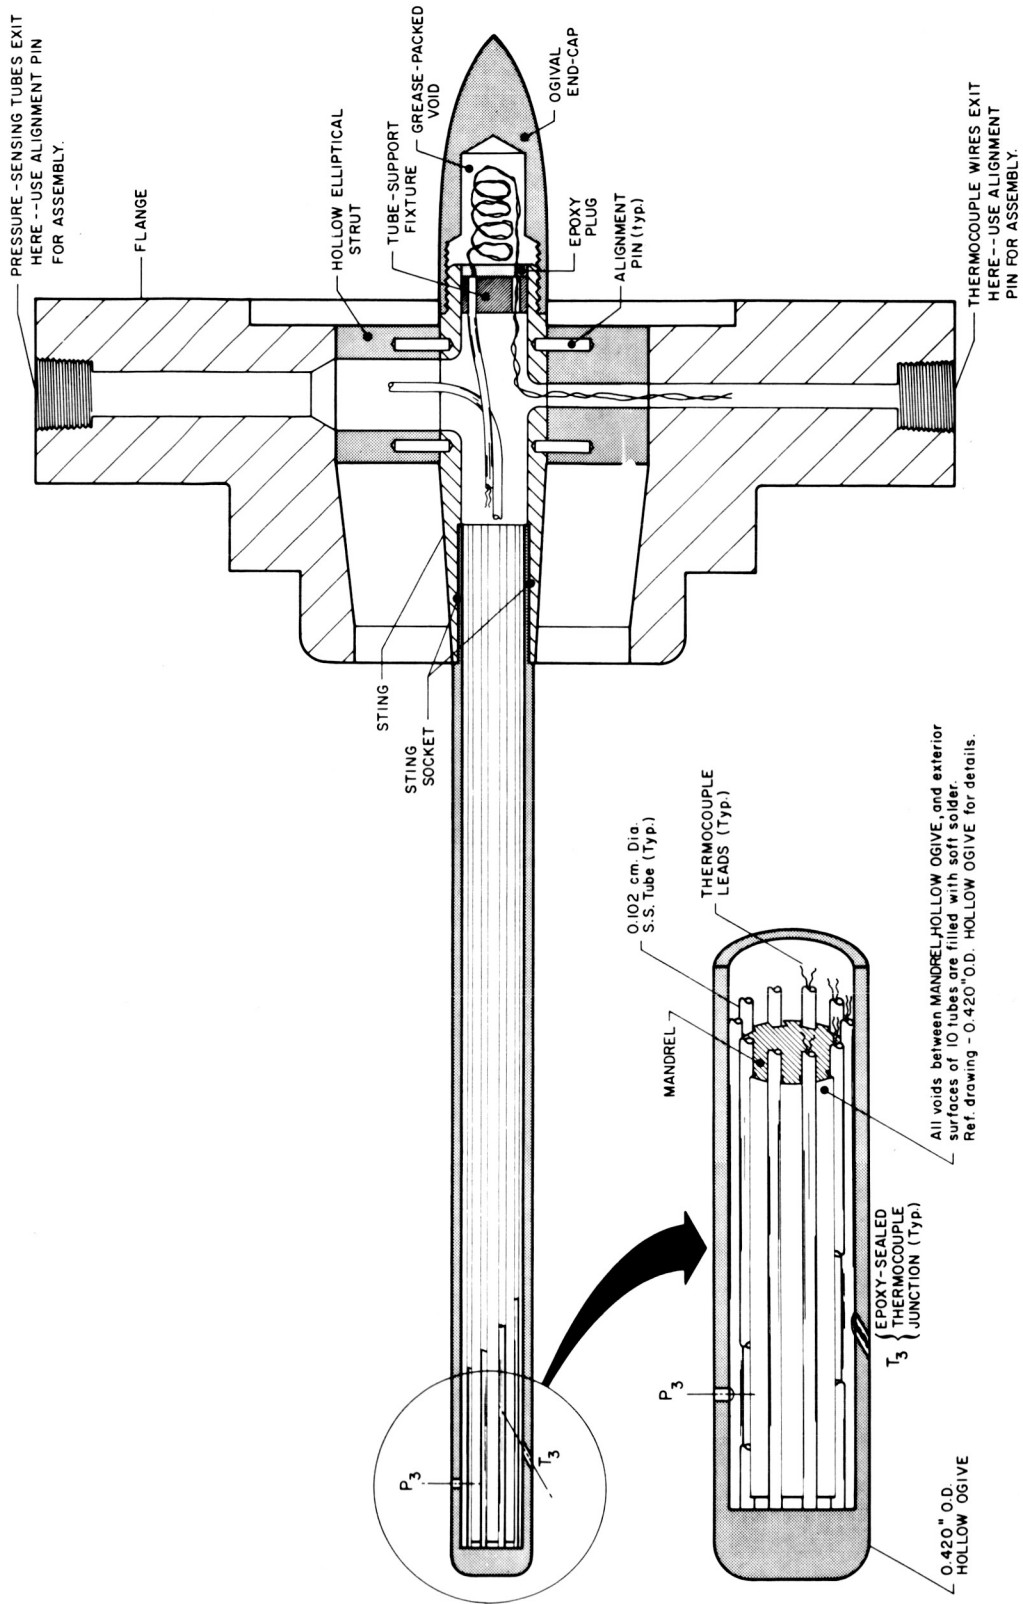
Sketch of instrumented ogive and sting assembly.
